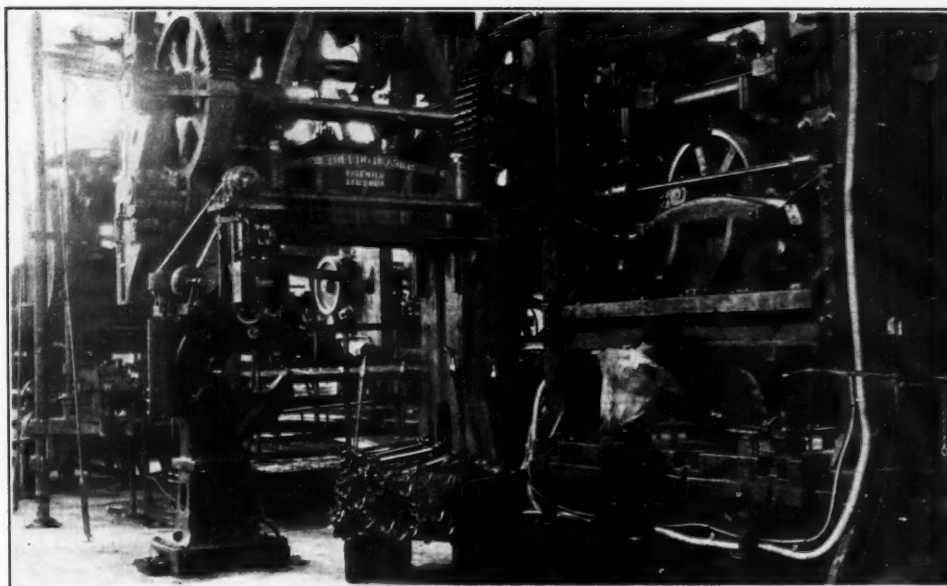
Close-up of fender battery, which is close to head of conveyor
